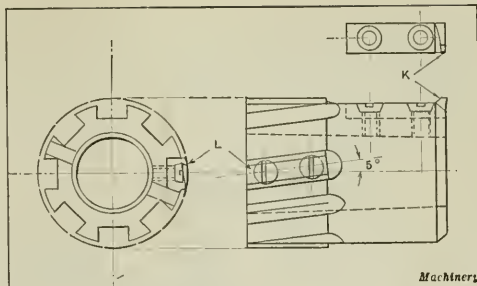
Combination Boring and Reaming Cutter used in Fixture shown in Fig. 1
